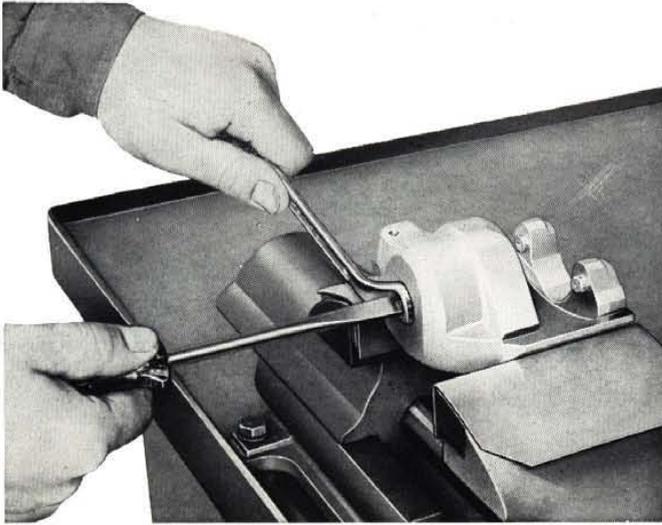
Removing brake caliper self-adjusting pin nut.
